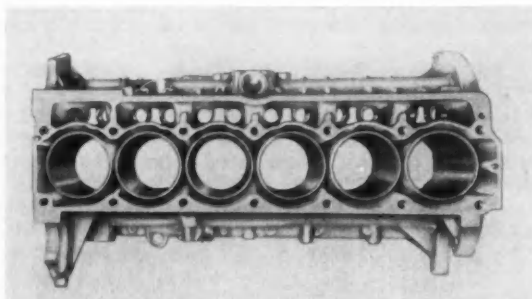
Top view of Chrysler die-cast aluminum cylinder block.
